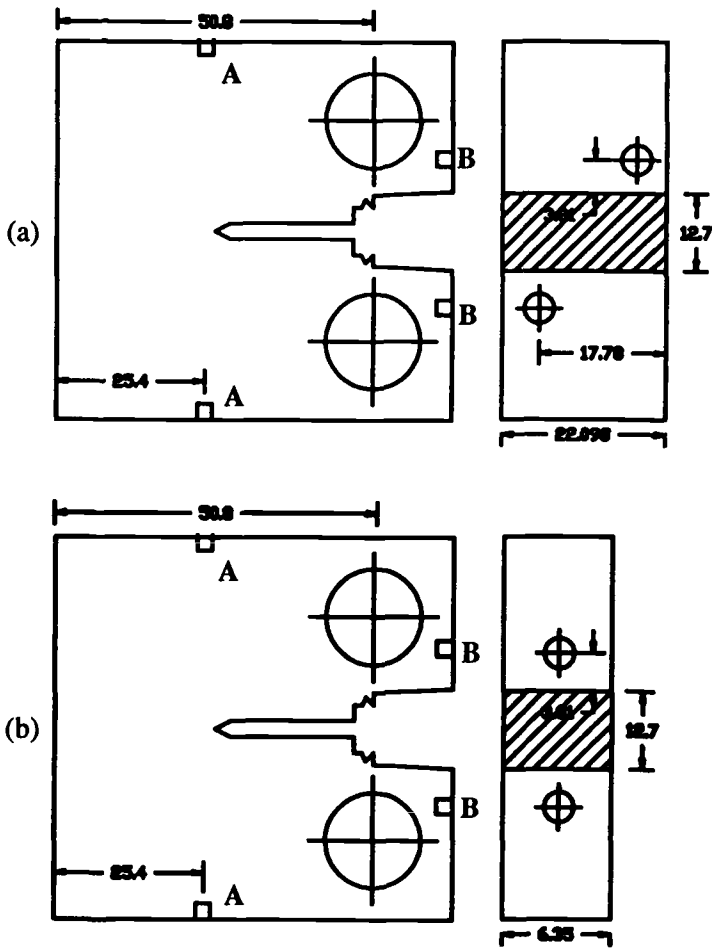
Geometry of CT-type specimens used for creep crack growth testing and electrical lead locations (unit: mm).
